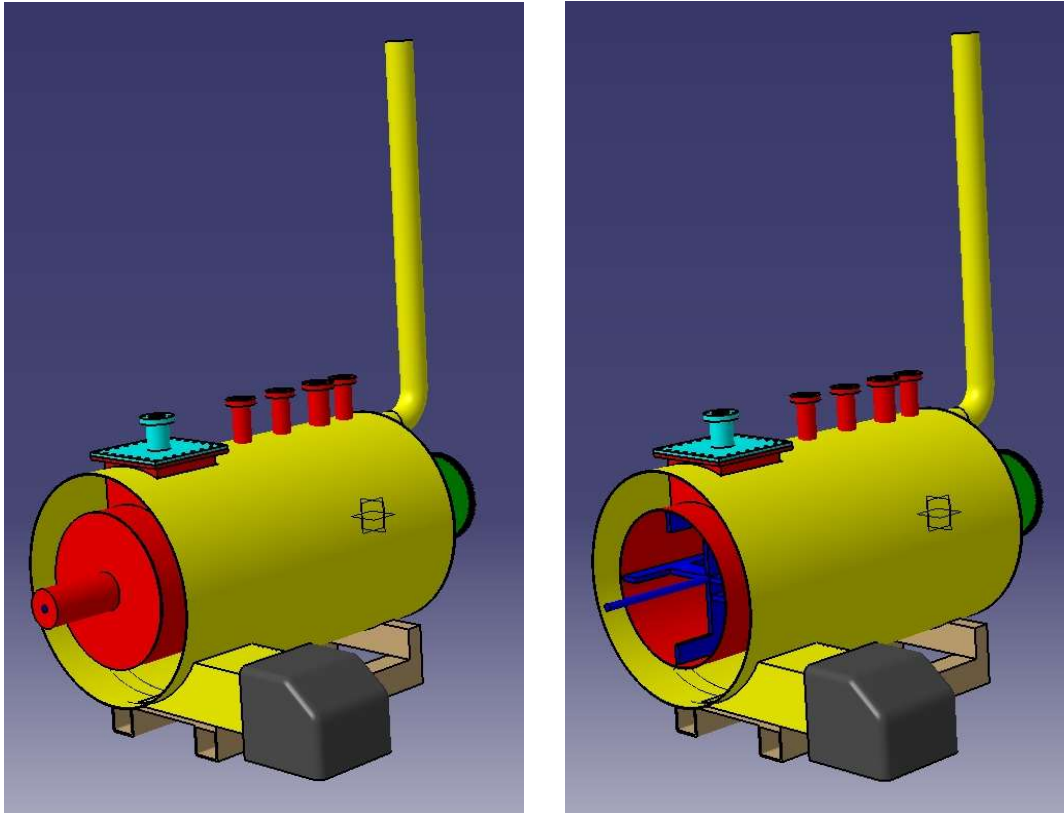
Pyrolysis reactor – assembly without thermal insulation, open front faces
